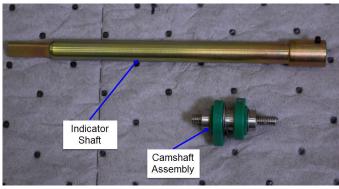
Remove the Indicator Shaft with Camshaft Assembly
